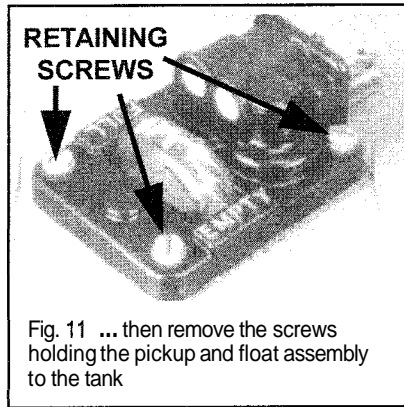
then remove the screws holding the pickup and float assembly to the tank
